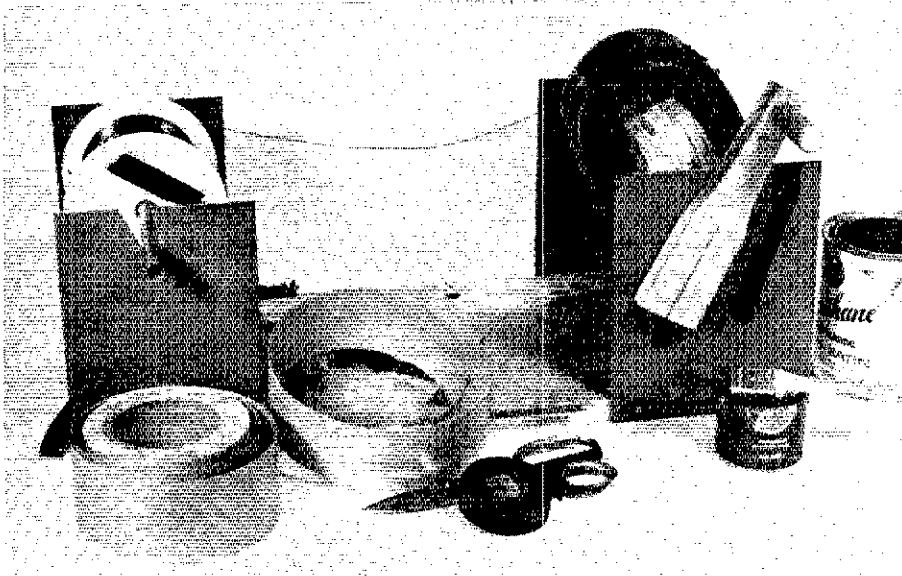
This winding jig can be made from odds and ends likely to be found in nearly any home workshop. Shown is a coil being wound on the original fiber spool which is supported by the low-voltage winding. The latter winding is mounted on a crank driven wooden mandrel. A fairly close fit is needed to avoid distortion caused by tension of the new winding.
